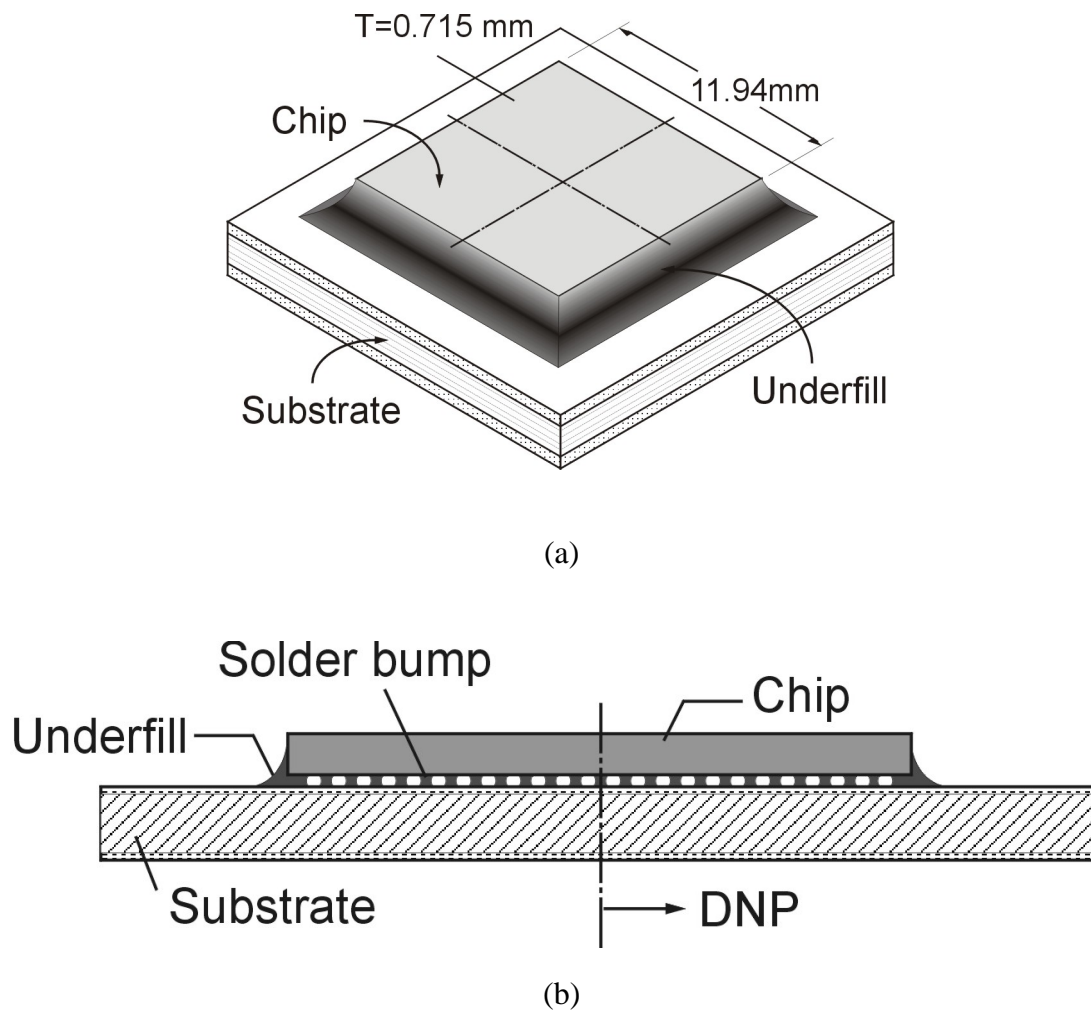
(a) 3-D view of flip-chip (b) cross-section view of flip-chip
